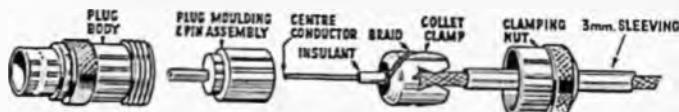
How to load the "Belling-Lee" Coaxial Plug Type L.734/P.
